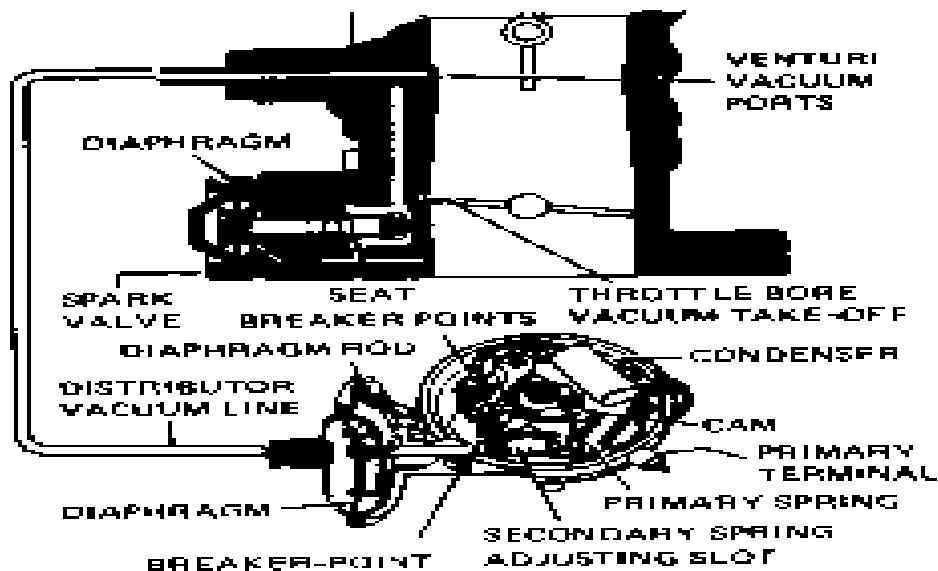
Vacuum-line connections between a carburetor and a distributor having full vacuum control (Ford Motor Company)
